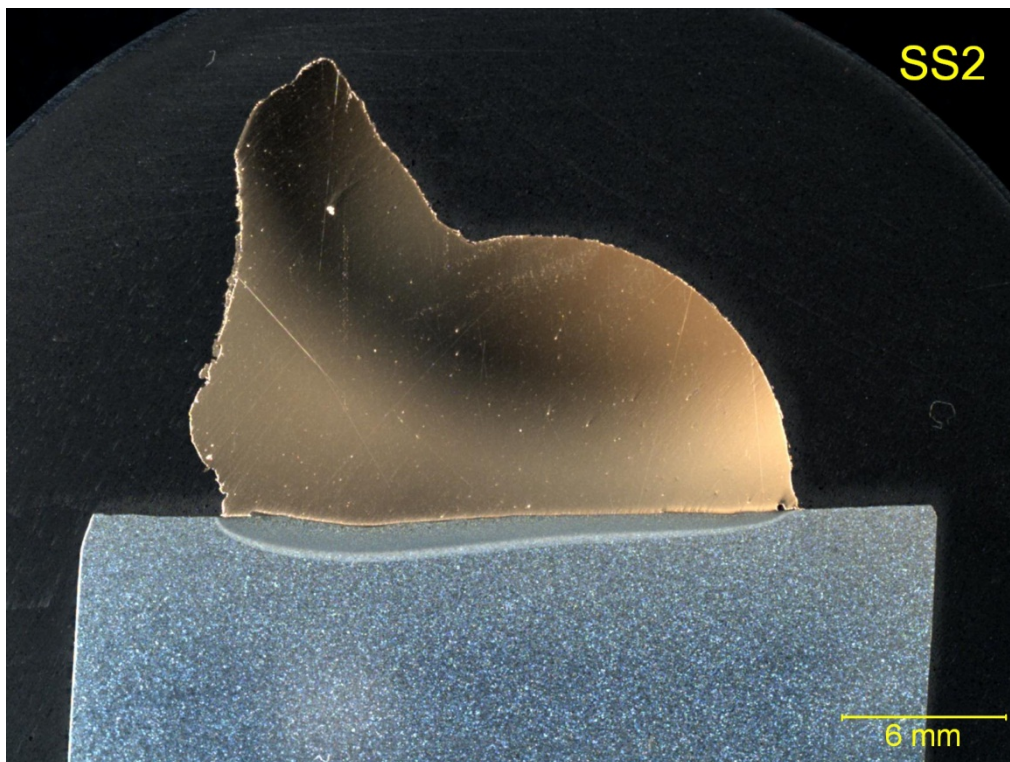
CAD Weld Joint Standard Chemistry Rail #2
